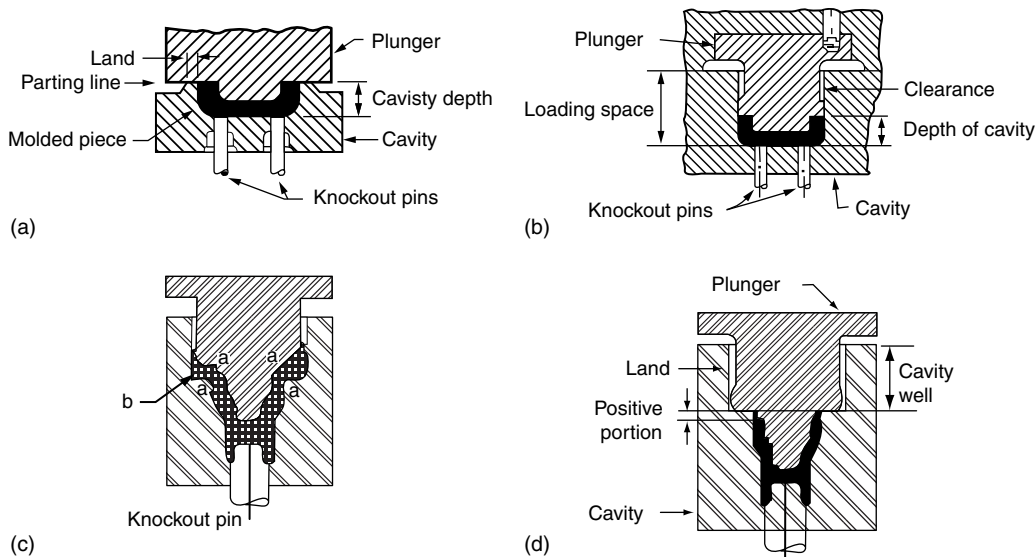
Compression molds. (a) A simple flash mold. (b) A positive mold. Knockout pins could extend through plunger instead of through cavity. (c) Semi-positive mold as it appears in partly closed position before it becomes positive. Material trapped in area b escapes upward. (d) Semipositive mold in closed position.
